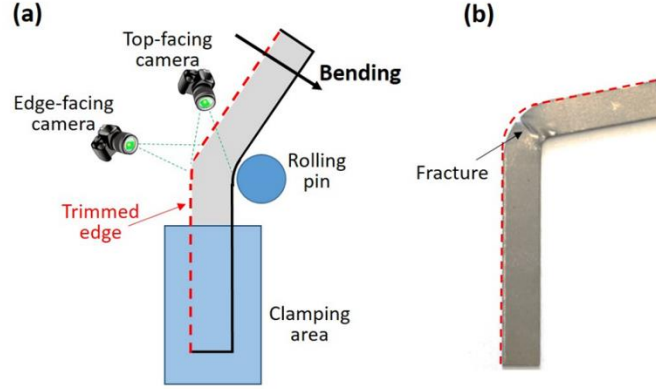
(a) Schematic of side-bending testing of a trimmed specimen and (b) bent and fractured specimen.
